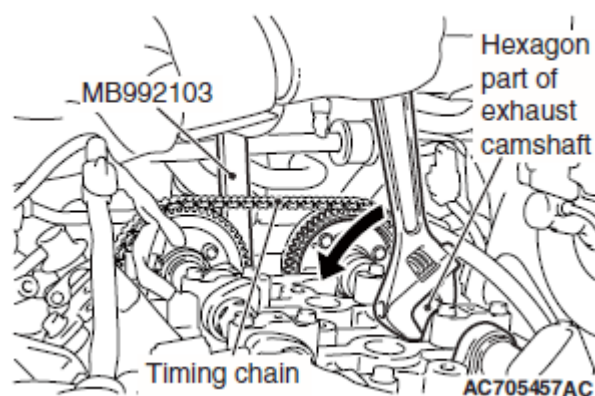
Identifying Timing Chain To Camshaft Sprockets
